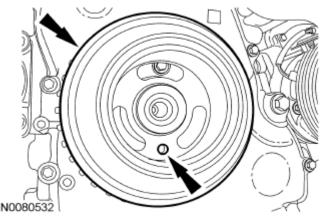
Locating Position Of Crankshaft Pulley Hole Courtesy of FORD MOTOR CO.
